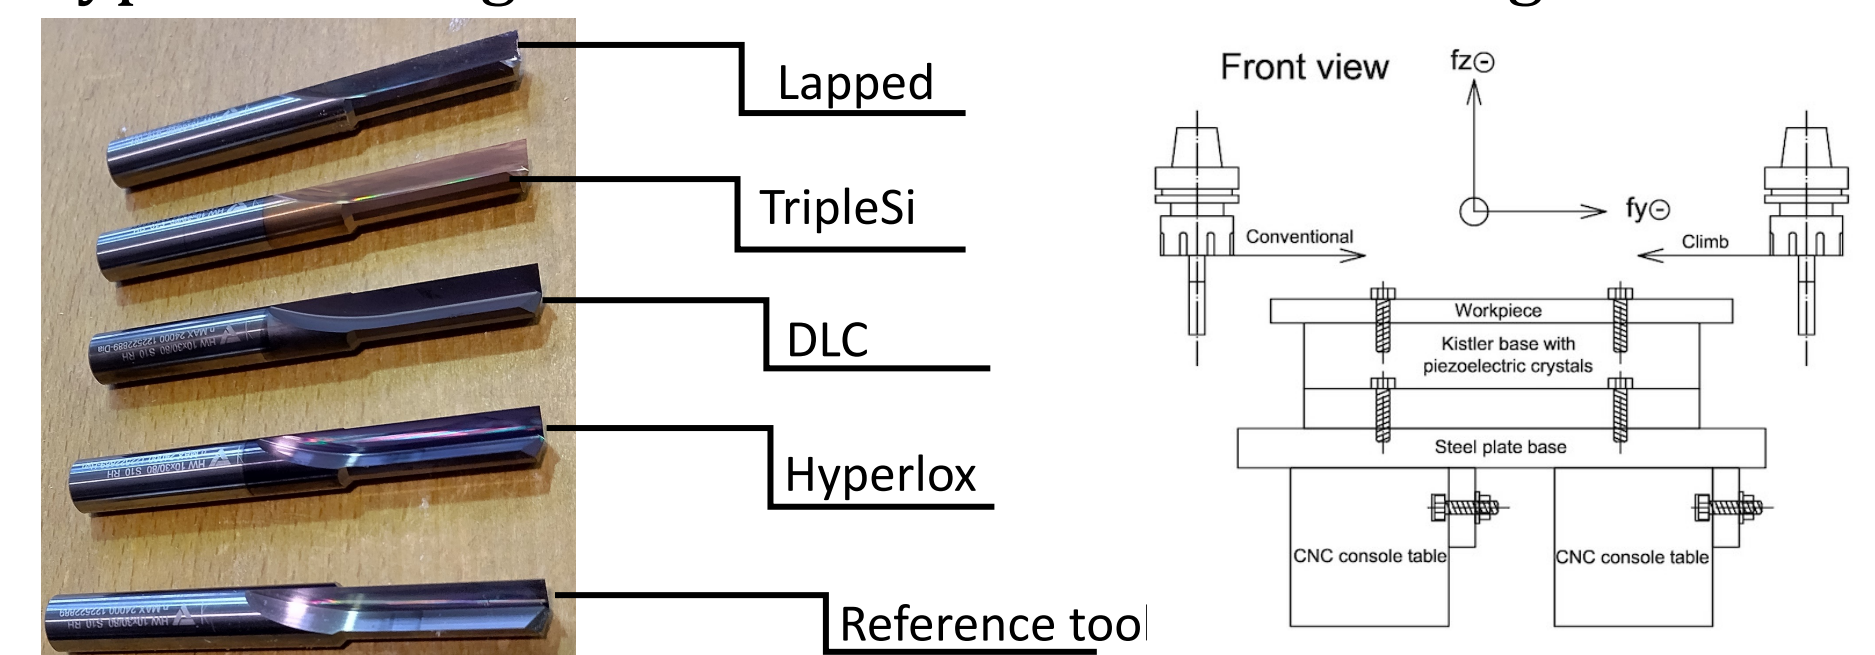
Tools with different type of coatings; Scheme of dynamometer Kistler
